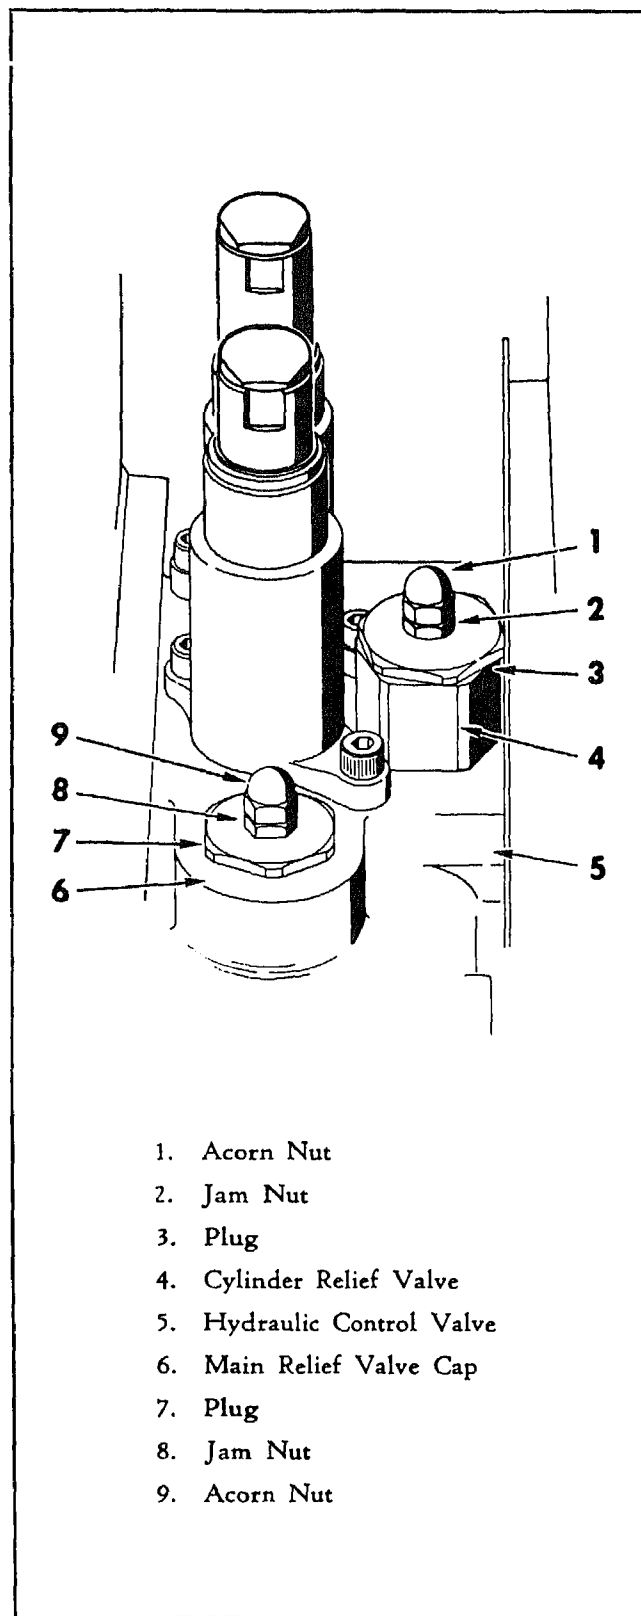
Control Valve, Main Relief Valve, and Cylinder Relief Valve Adjustment
